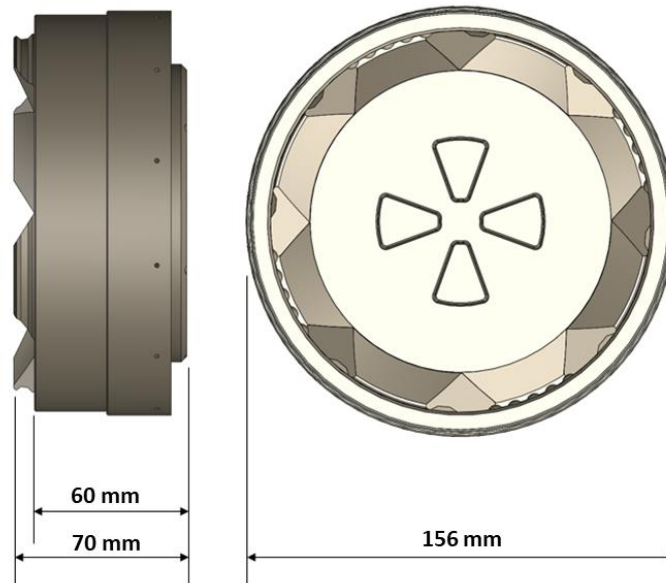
HOTDOCK - Side and Top view with basic dimensions
